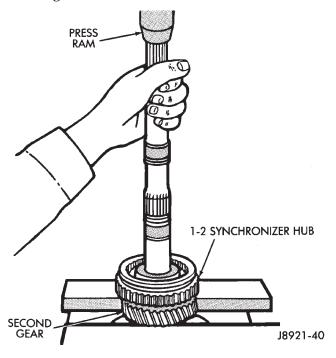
Remove Second Gear And 1–2 Synchronizer/Reverse Gear
